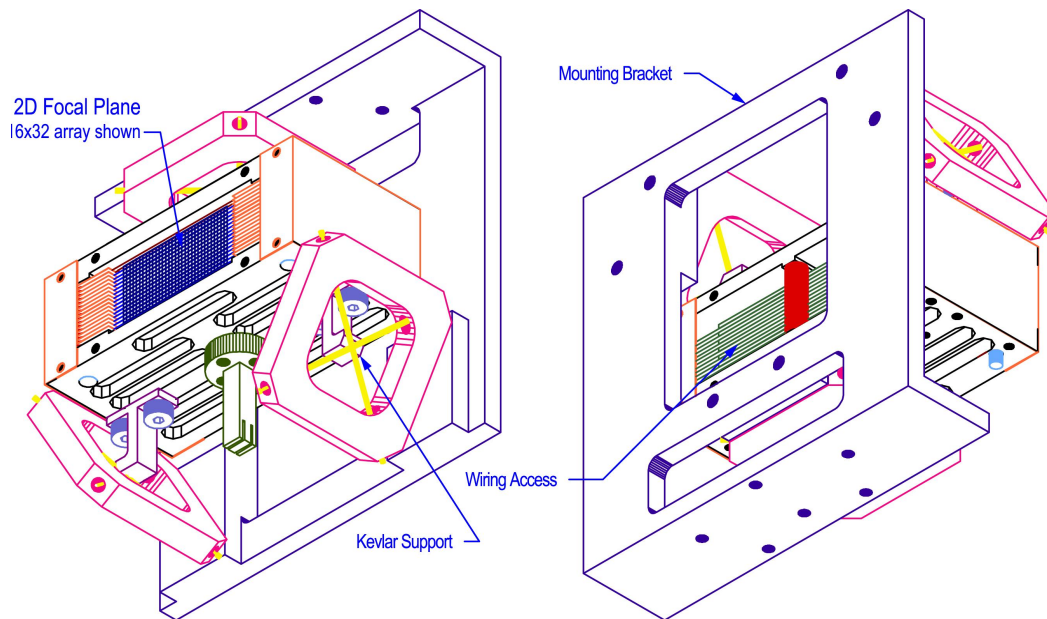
Completed detector array package, showing mechanical and thermal attachments but not the electrical connectors. The cold detector package is mounted by a mechanically stiff yet thermally isolating support, using a kinematic Kevlar suspension²⁴.
